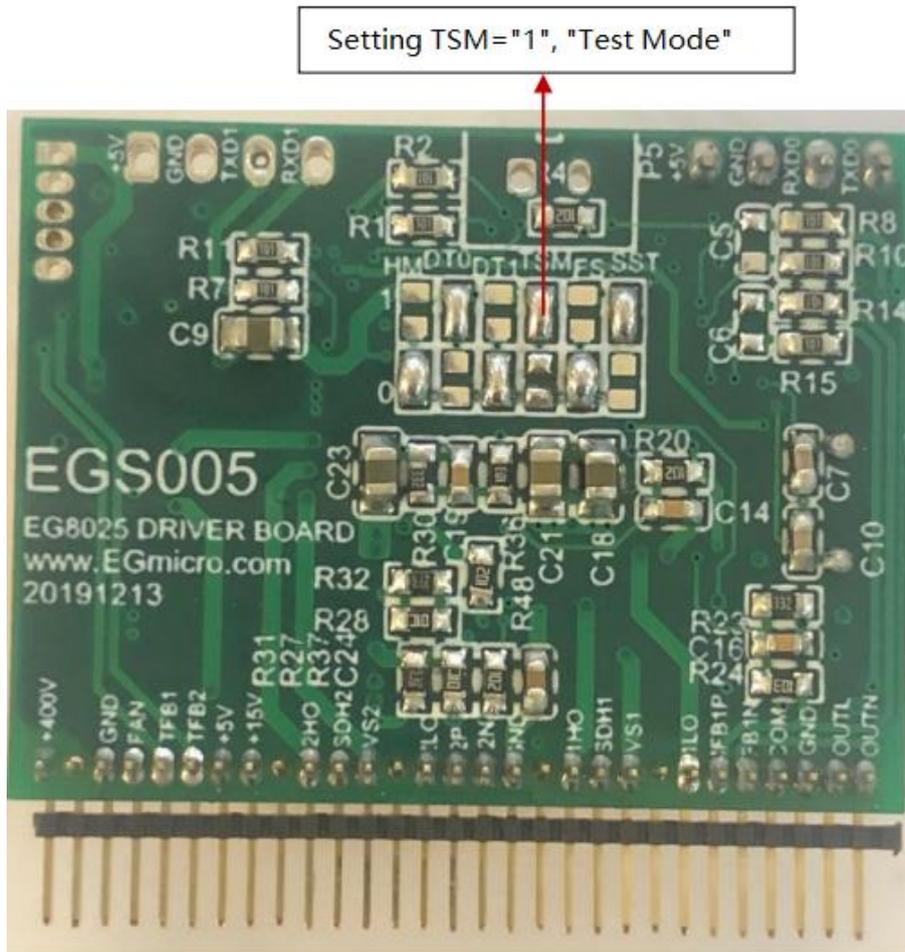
Set EGS005 Driver Board to Test Mode
